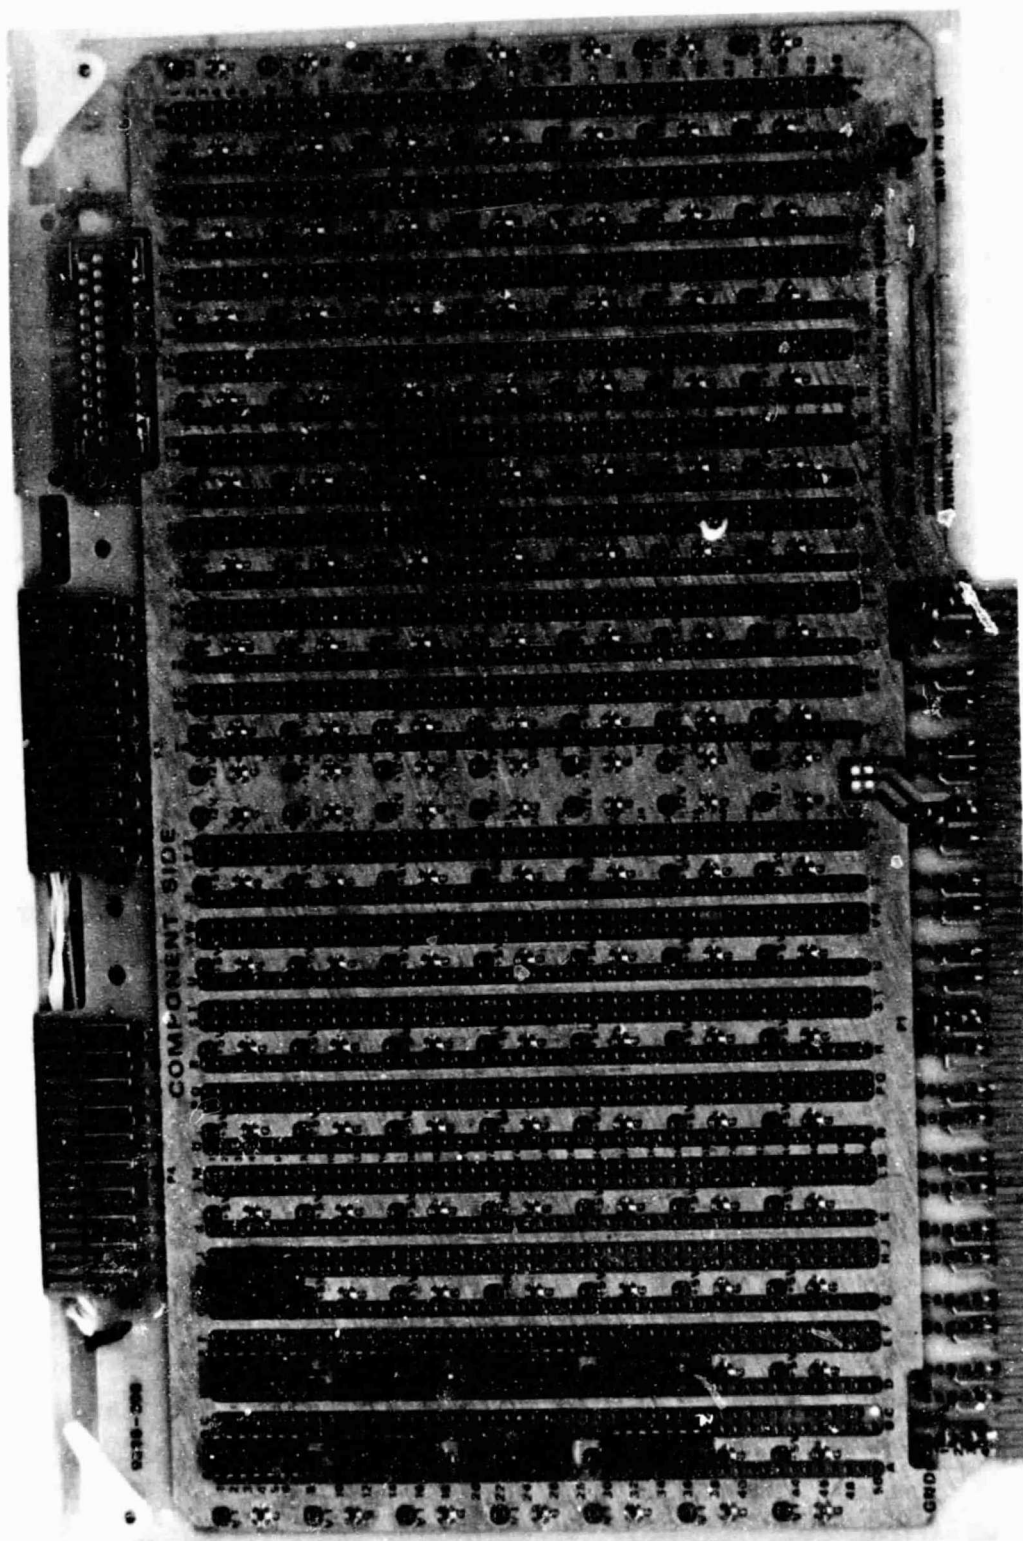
Universal Prototype Board (7.5 x 11 inch card)
